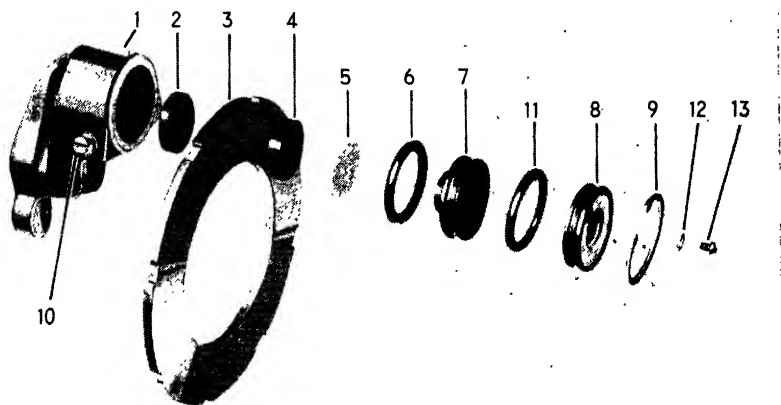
Parts of brake for 6.00-6 wheel. (*Aviation Products Division, The Goodyear Tire and Rubber Co.*)
